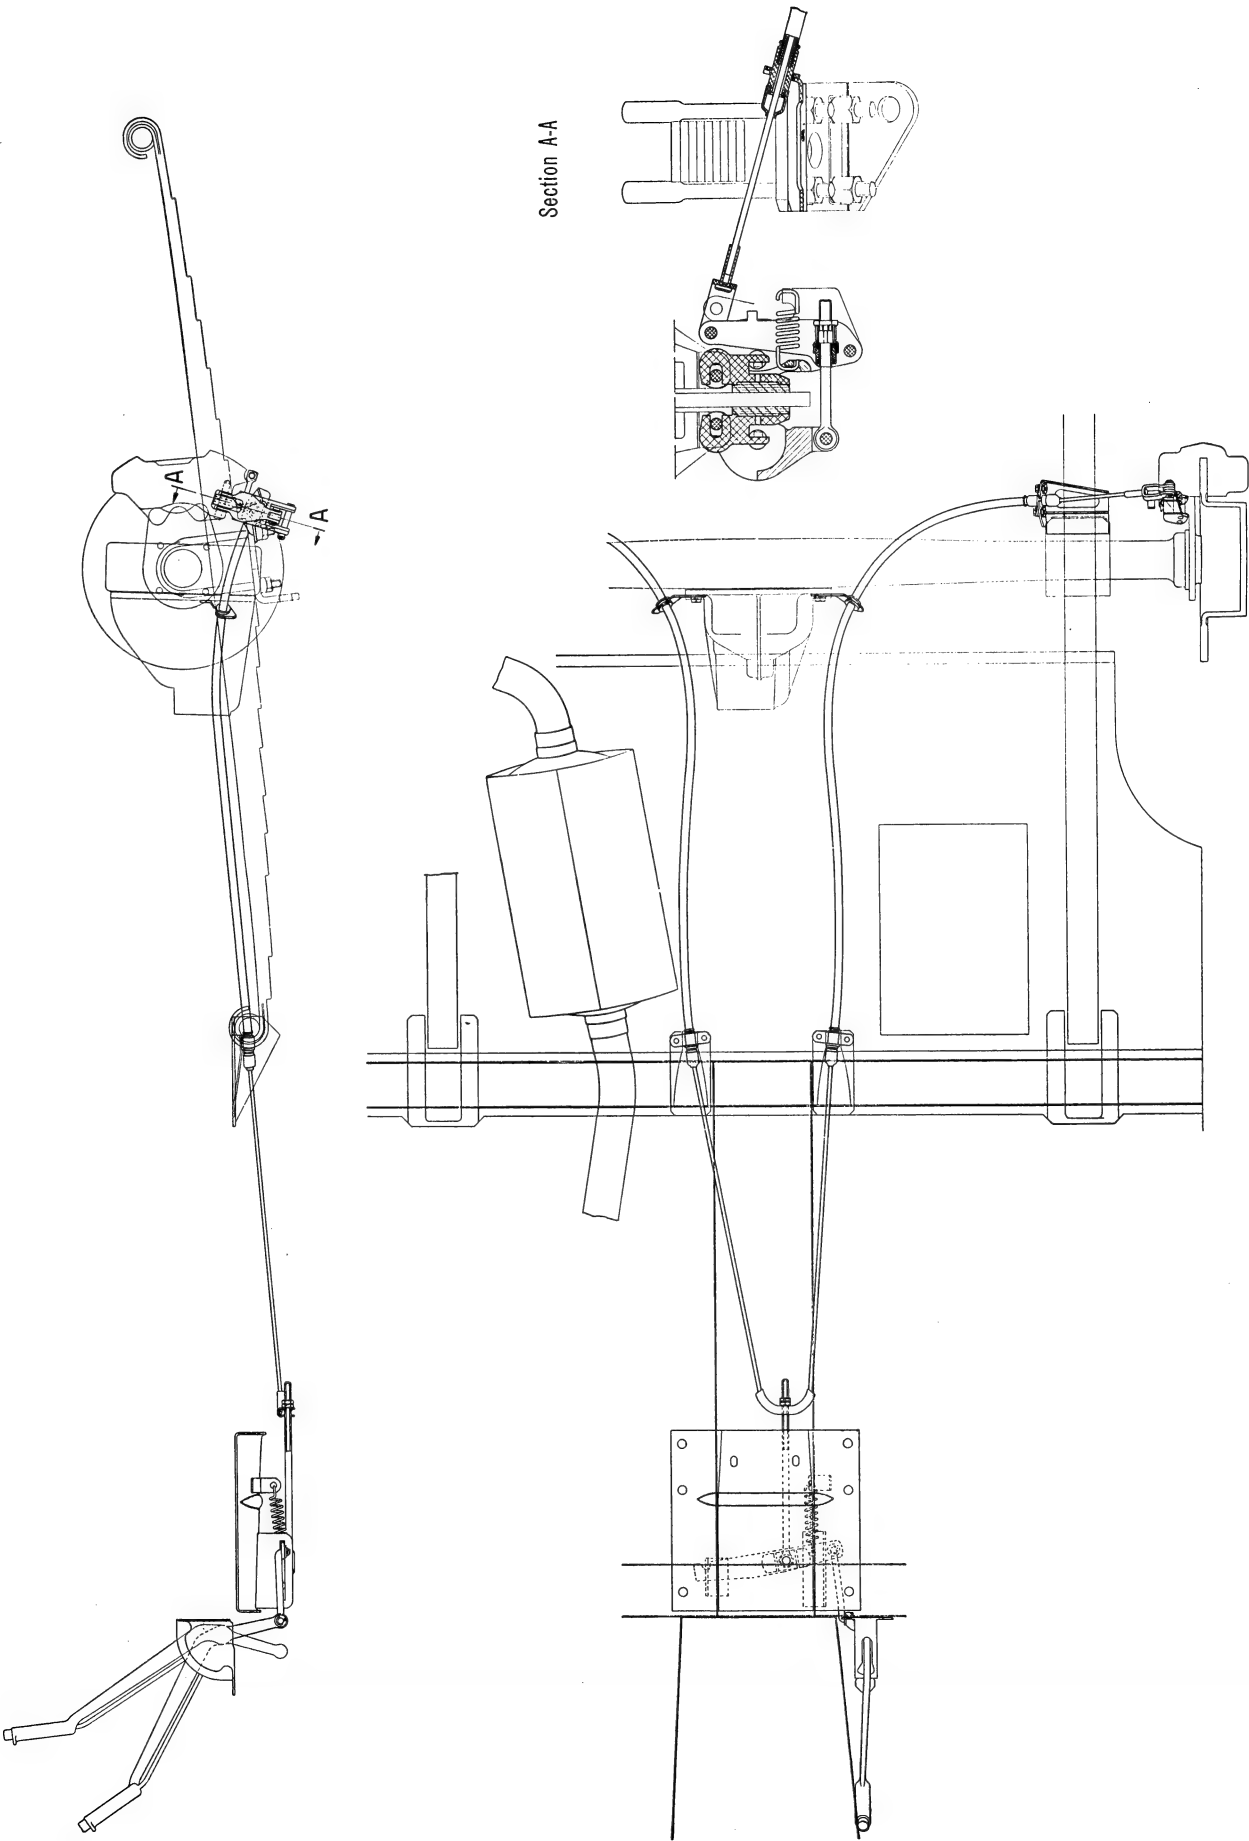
Layout of manual brake assembly with detail of actuating mechanism on rear wheel disc.
